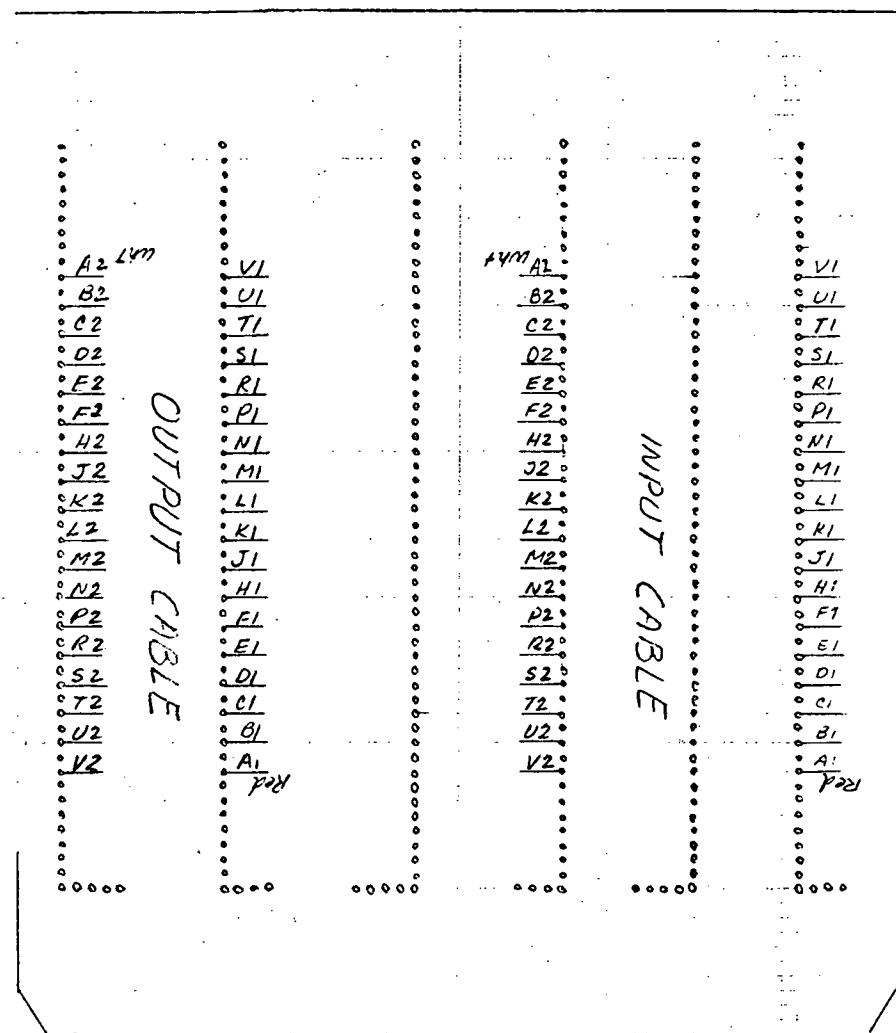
PHYSICAL LAYOUT OF PLUG CARD 1-H
